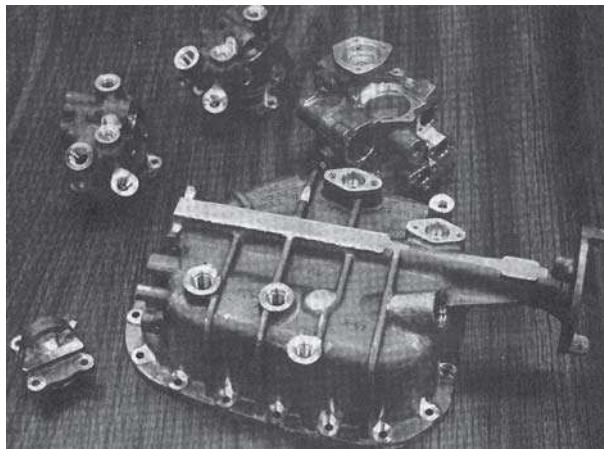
Fuel control housings finished in vibratory machine to remove burrs (Stauffer 1979)
